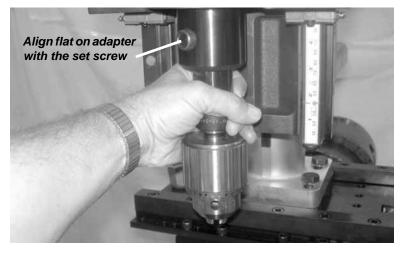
Insert the end mill holder or MT #3 adapter with chuck into the spindle. Align the flat on the adapter with the spindle set screw.
